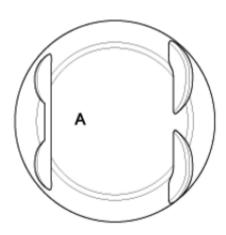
Identifying Piston Size Code Courtesy of HYUNDAI MOTOR CO.
